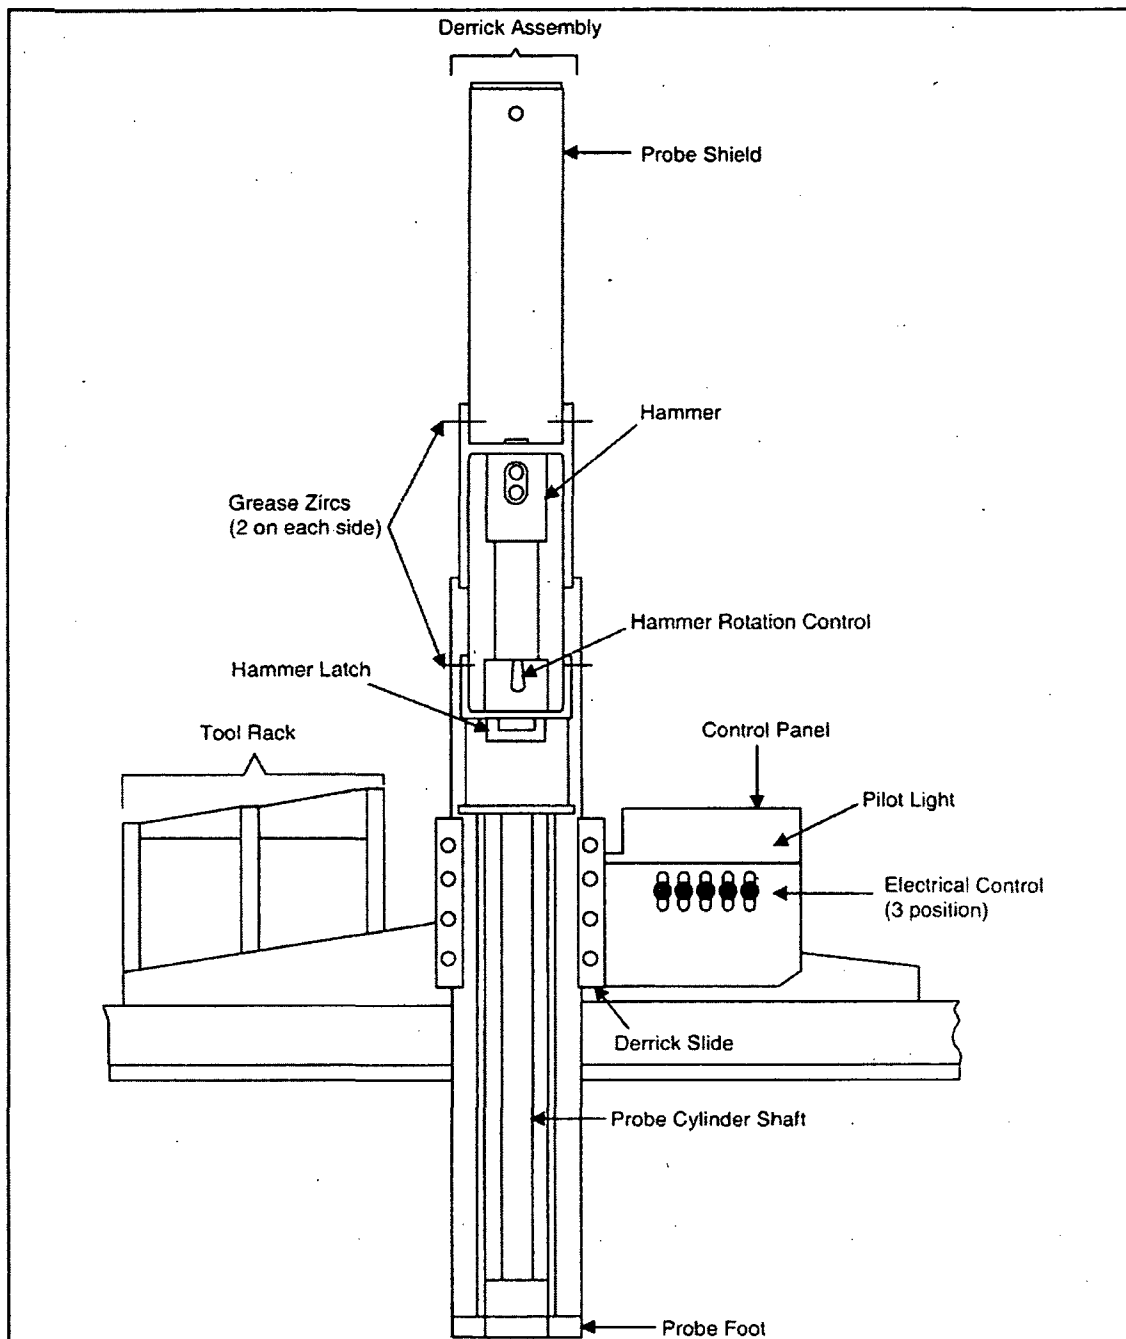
Side View of Inspection Points on the Hydraulic Unit
